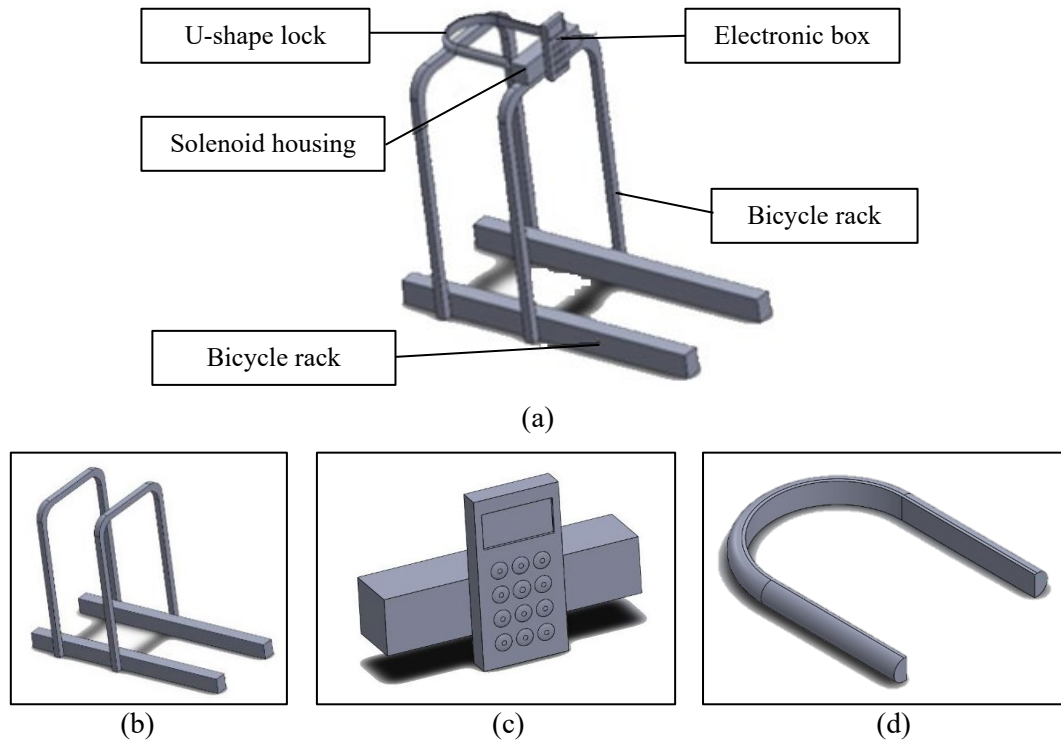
(a) anti-theft bike rack Solidworks drawing (b) Bicycle rack (c) Solenoid housing and electronic box (d) U-shape lock
